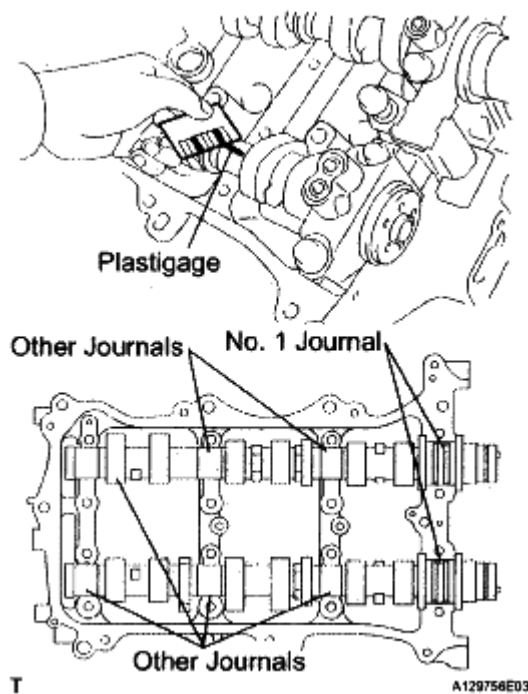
Measuring Plastigage At Camshaft Widest Point
